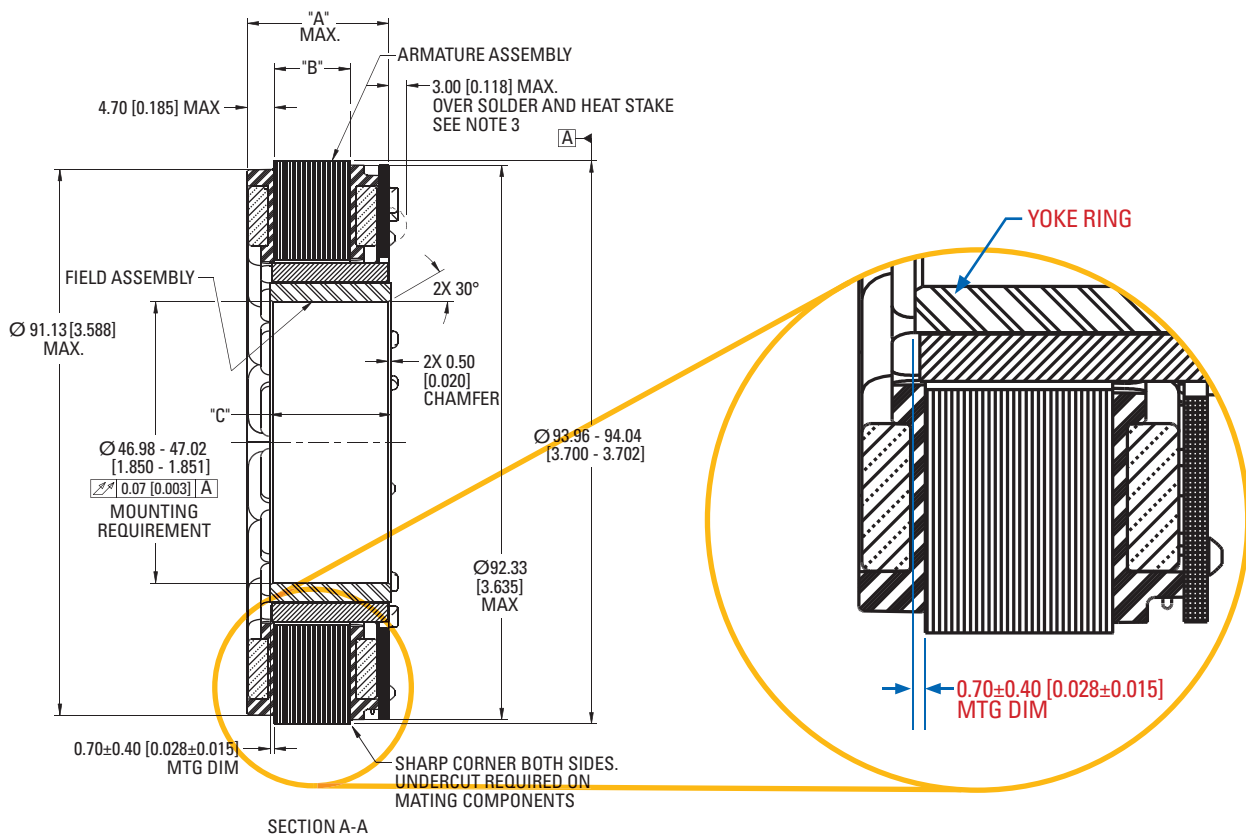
Illustration of mounting dimension displayed on a TBM2G-068XXX-XXXX-00 Outline. This dimension is measured from the left edge of the lamination stack to the left edge of the yoke material (not magnet).
